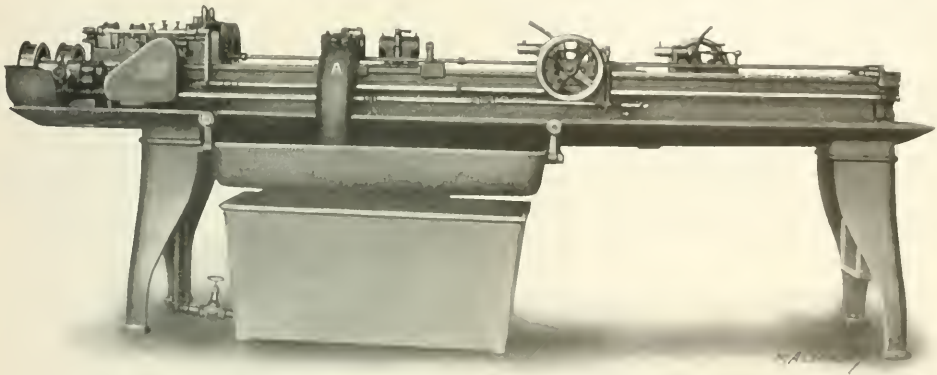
Rifle Barrel Drilling Machine built by the Diamond Machine Co.
